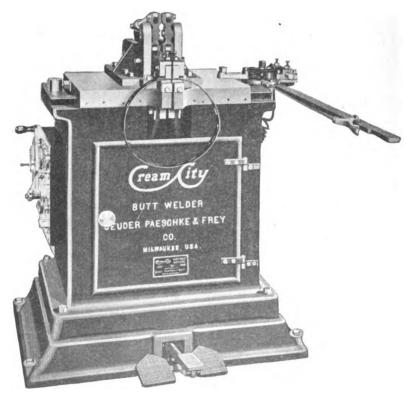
Foot-Operated Butt Welder Courtesy of Geuder, Paeschk", and Frey Company
